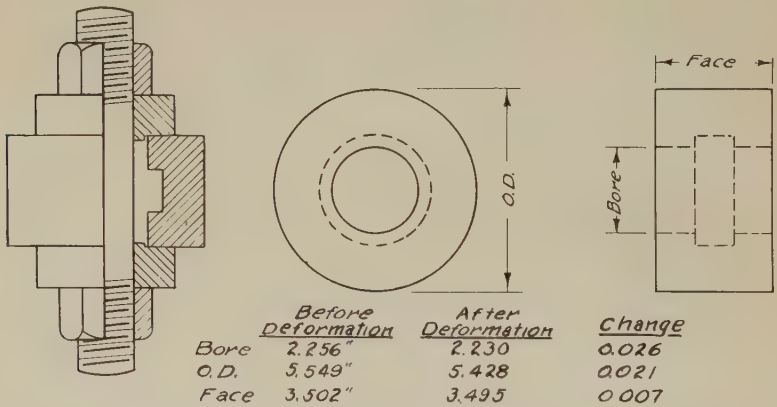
Illustrating the Inward Expansion of an Oversized Hole in a Gear Blank.
